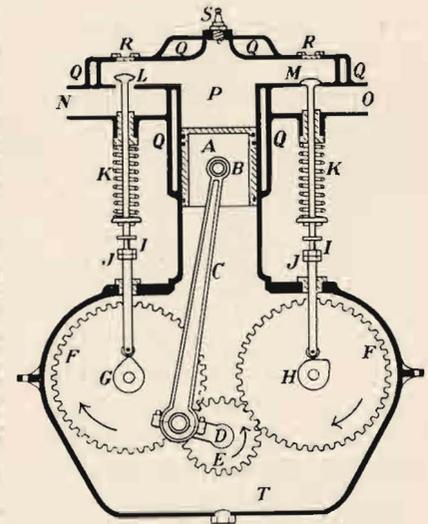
Details of a single cylinder four-stroke cycle engine.
